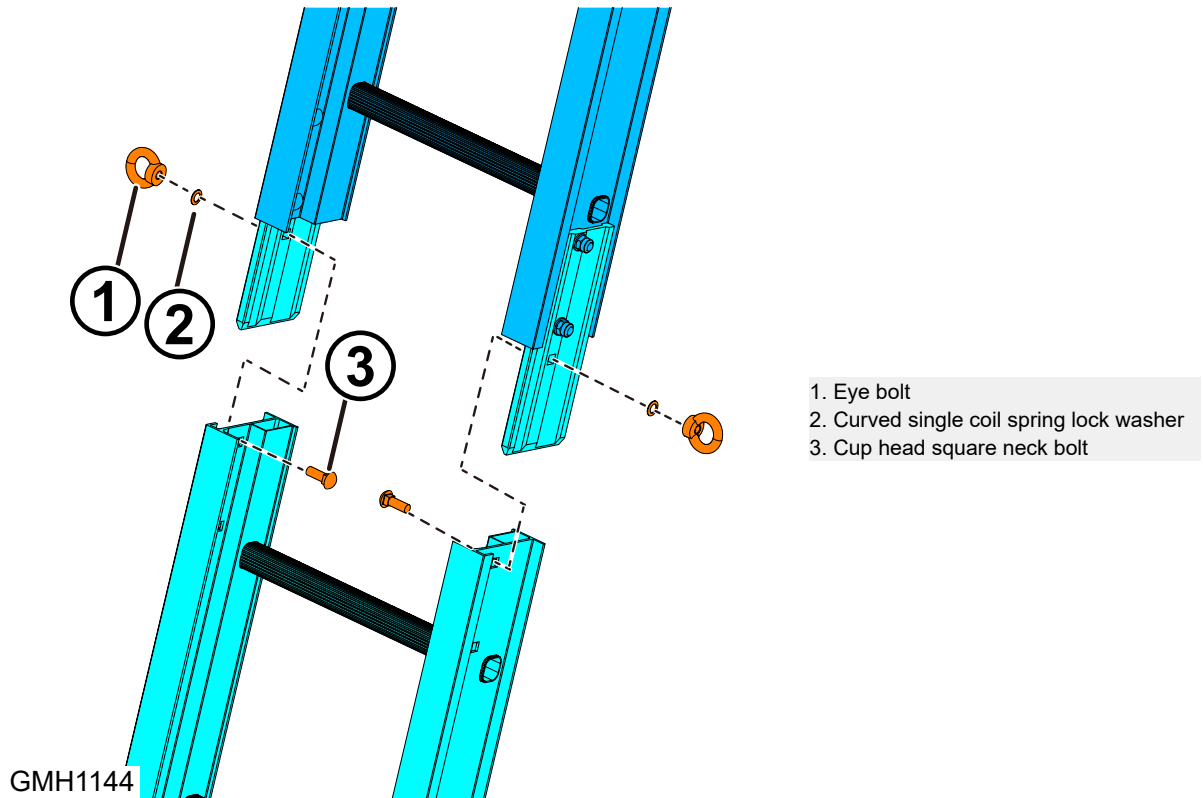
Inspecting the Connecting Parts of the Guide Rail
